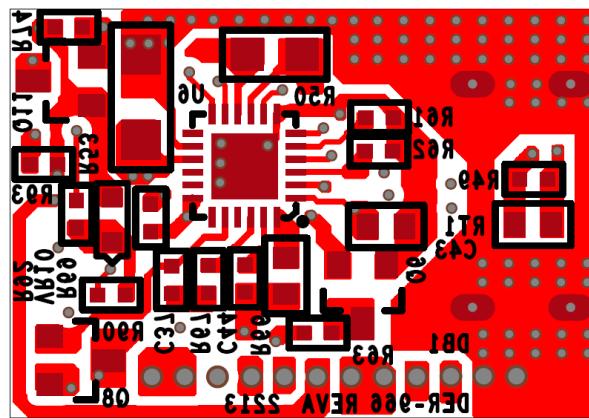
Daughter Board Printed Circuit Layout, Bottom.
